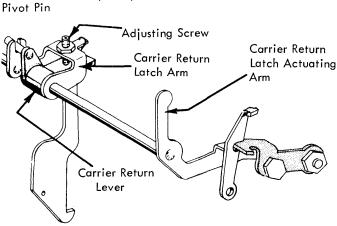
Clutch Latch Overthrow Adjustment (15 Inch Machine)
